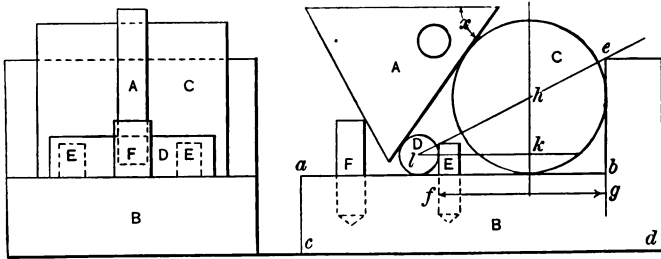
Making Angle Gauge for Whitworth Thread Tool
